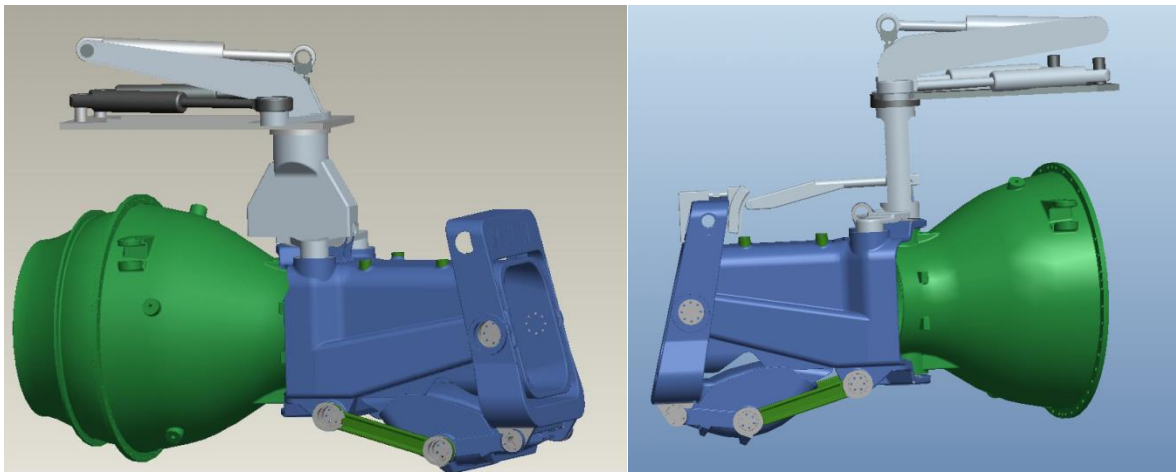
left, steering device with the protection cover mounted (but with missing push rod). Right, steering device with the cover removed. [10]
